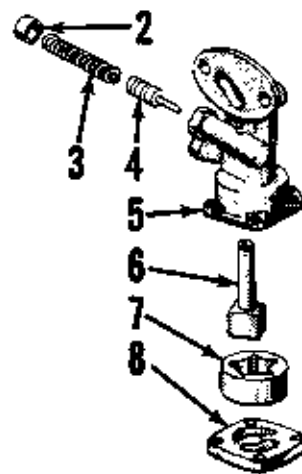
Exploded view of "G-rotor" type pump available for service installation in model NAA engines.
